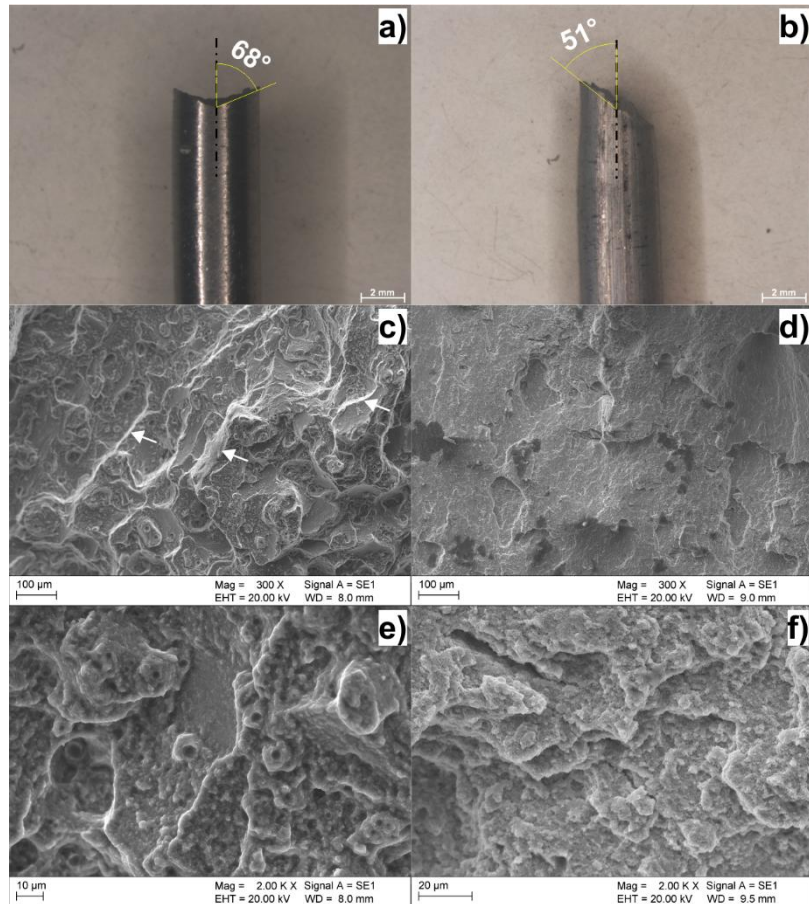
Fracture morphologies of the a), c) and e) as-built, b), d) and e) KoBo processed samples
